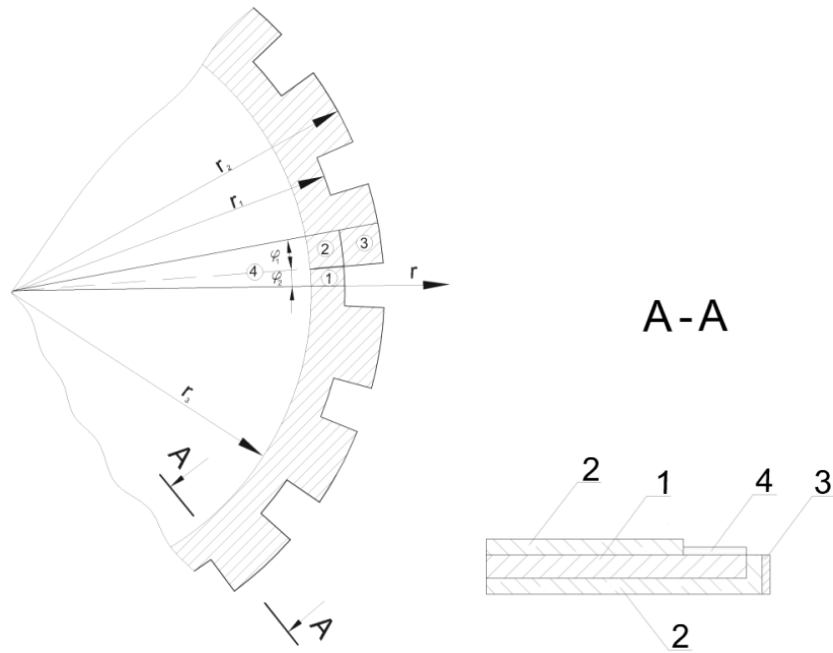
Shaped drive 1 - Drive; 2 - thermal screen; 3 - electromagnetic screen; 4 - weld metal).
